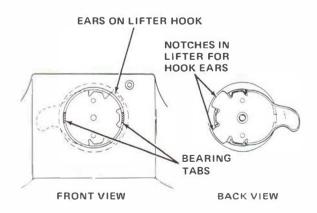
Positioning of the belt lifter, hook, and bearing
